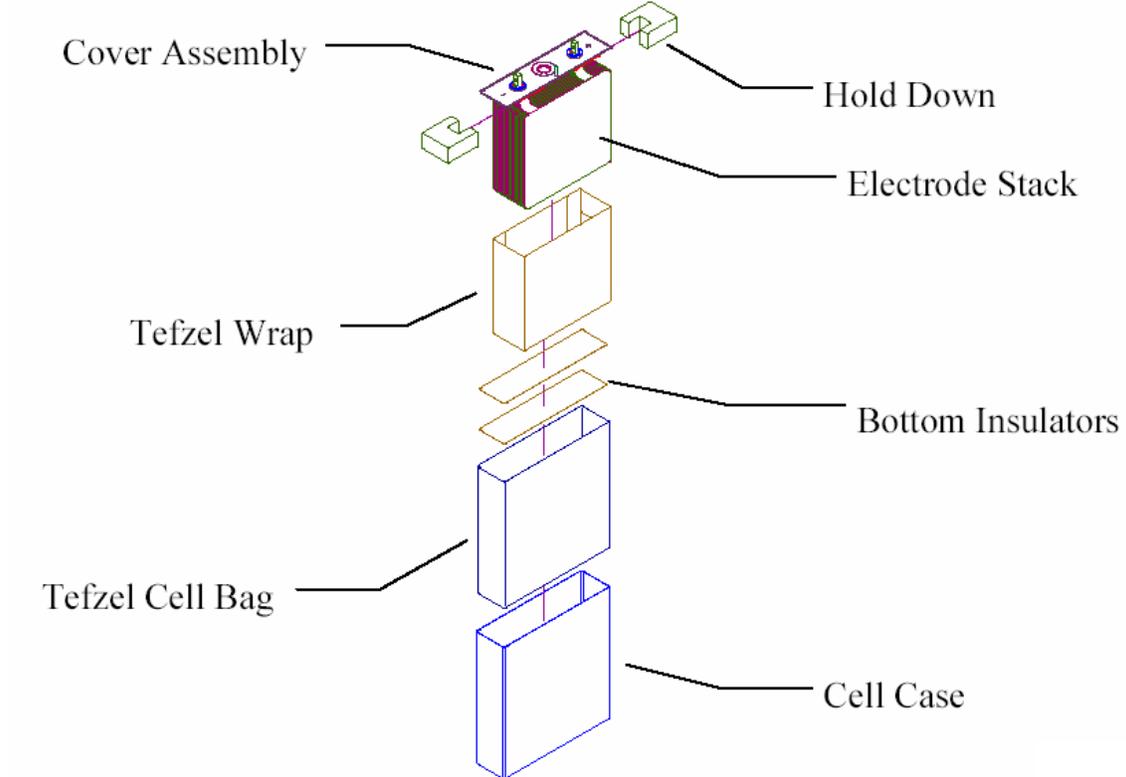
UPS Battery Cell, Exploded View
